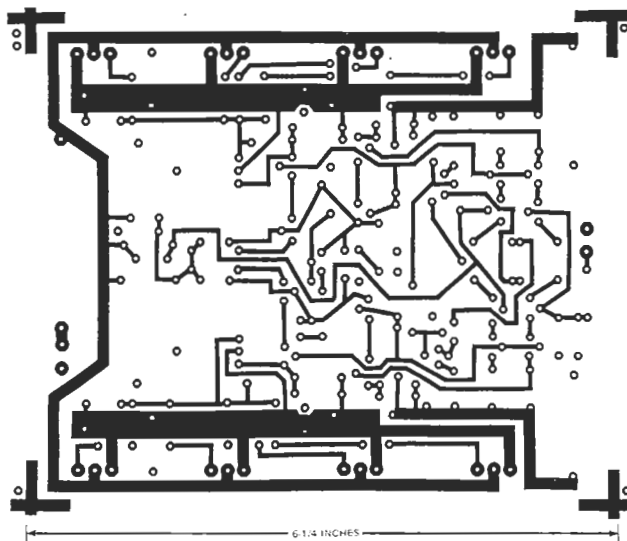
THE SOLDER SIDE of the amplifier board. Remember that you need one board for each channel.
